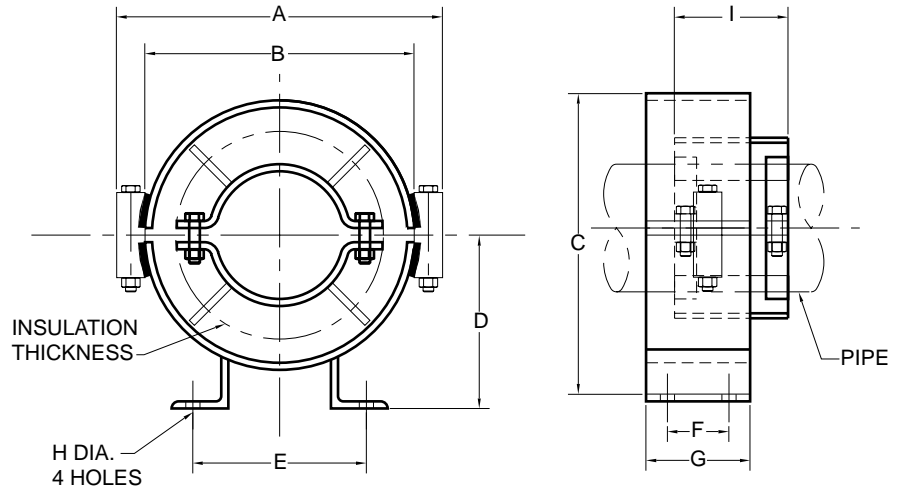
PIPE ALIGNMENT GUIDE
